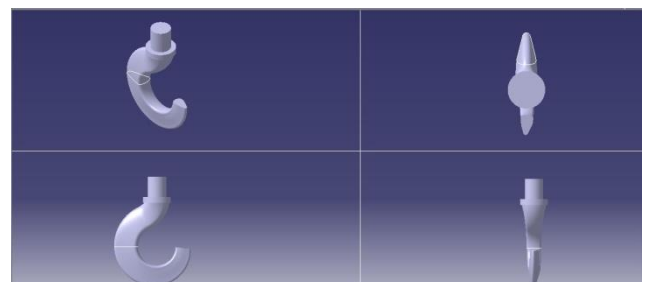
Modeling of EOT crane hook in new modified-1 cross section
